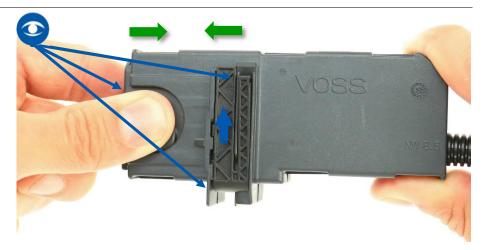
Incomplete assembly step of QC system 301 EFSP2
